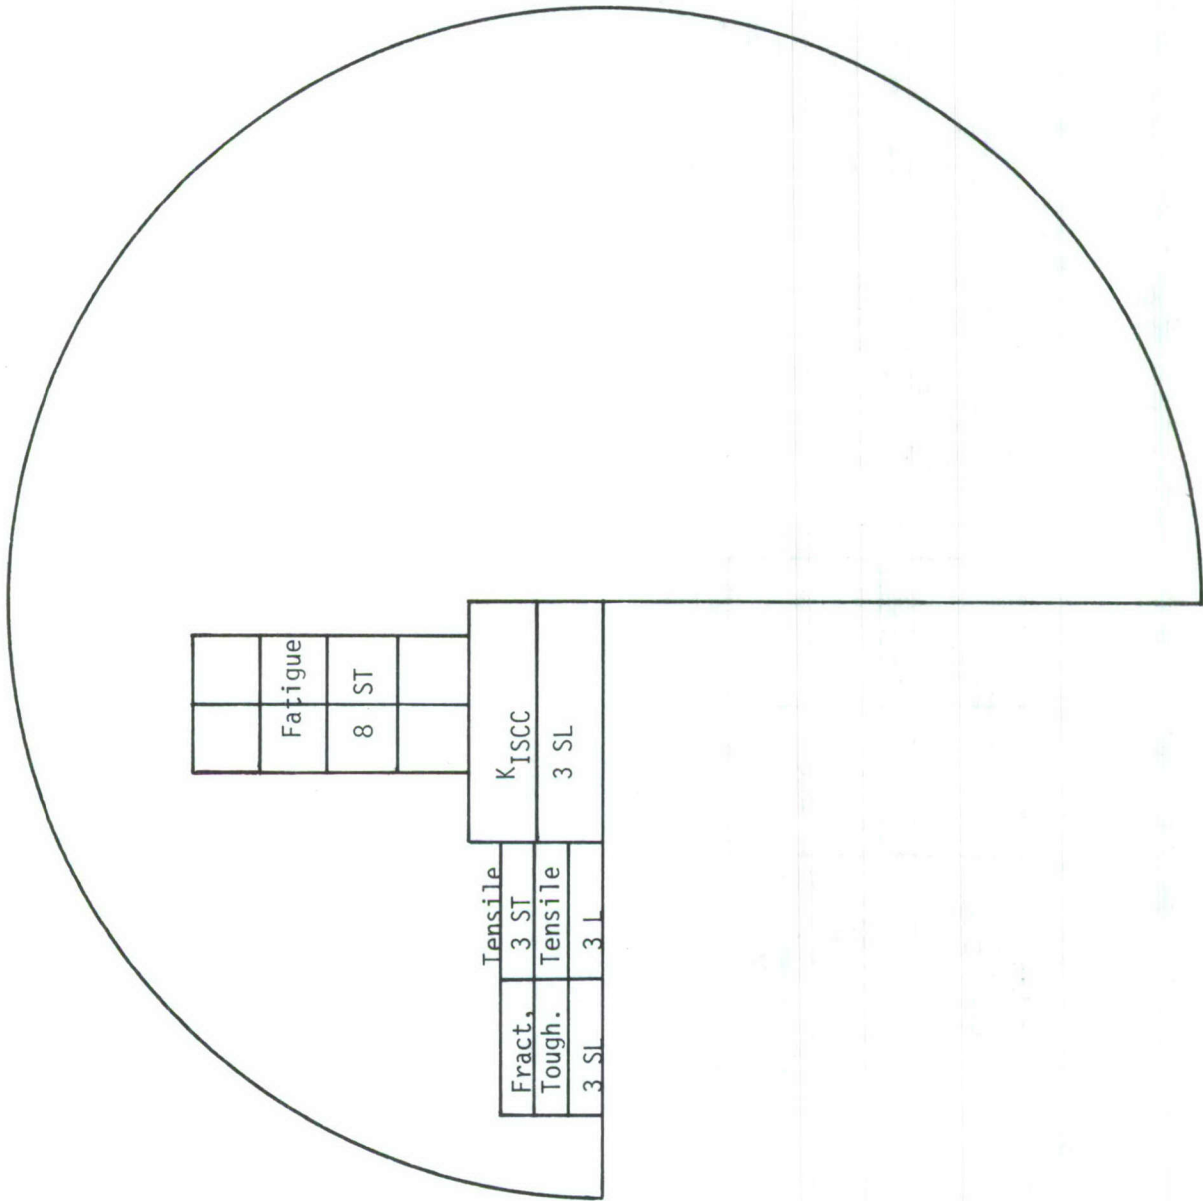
Specimen Layout for BCL/AFML Heat 10, Pancake Forging
